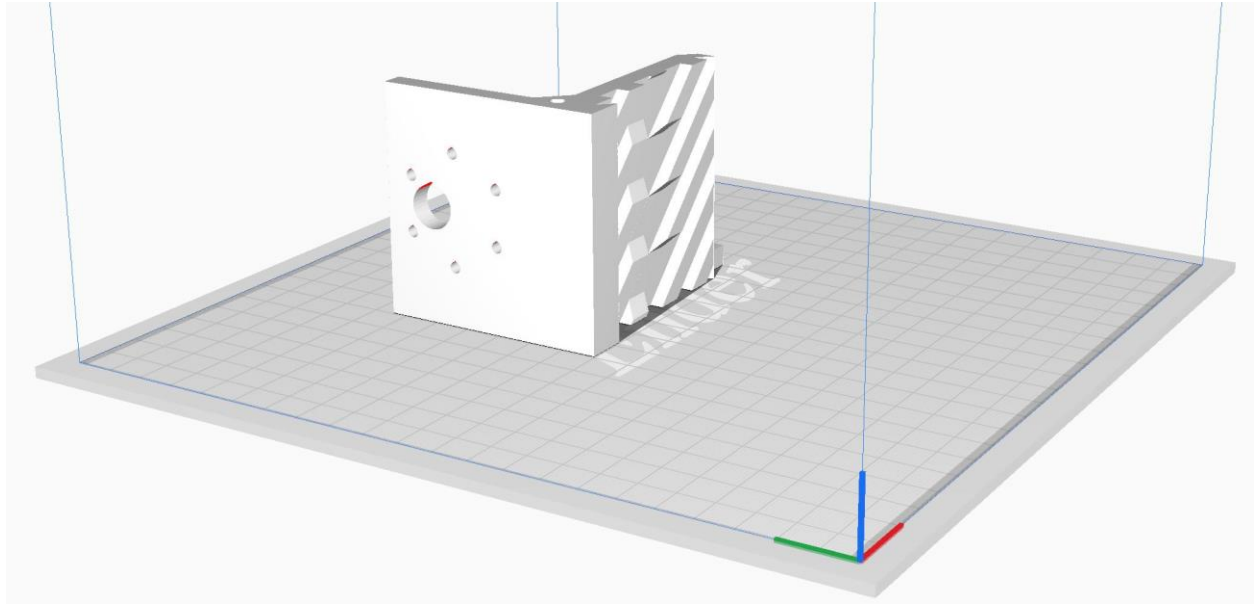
Secondary view of the print orientation for the motor mount attachment piece, showing that the teardrop shape for the motor attachment holes point upward and the way that the channels should appear in the correct print orientation.
